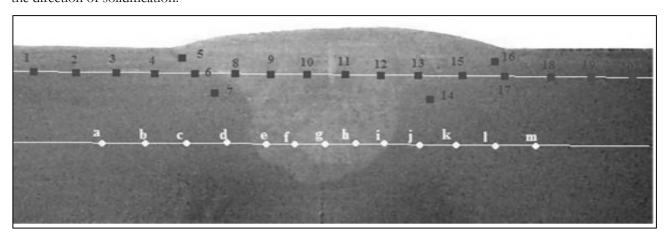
Macroscopic image of a butt weld cross-section
